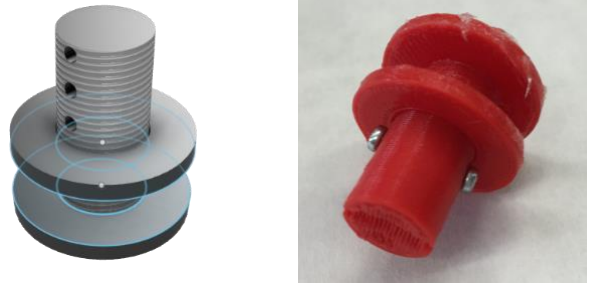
CAD of mold for winding coil(left) and a 3D printed version(right)
